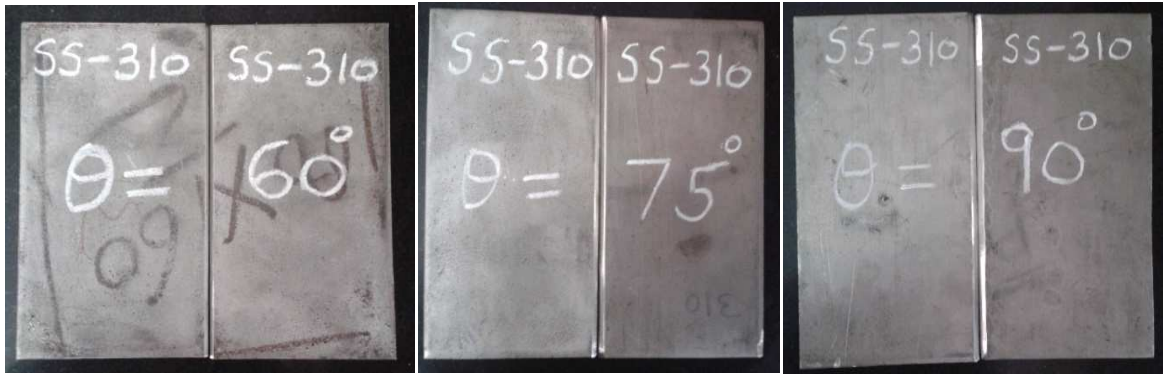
Groove angles on SS 310 welding specimens
